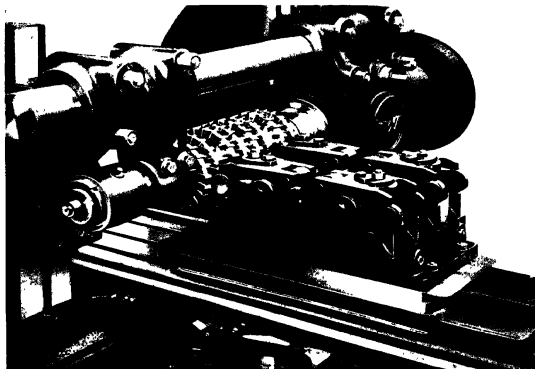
HEAVY ATTACK OF A GANG OF 8 FACING CUTTERS MACHINING  $2 \times 4$  PARALLEL SURFACES OF TWO STEEL CASTINGS CLAMPED IN THE REVOLVING JIG (FIG. 129)
